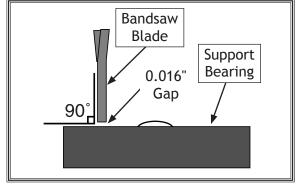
Blade set perpendicular (90°) to the support bearing face.
